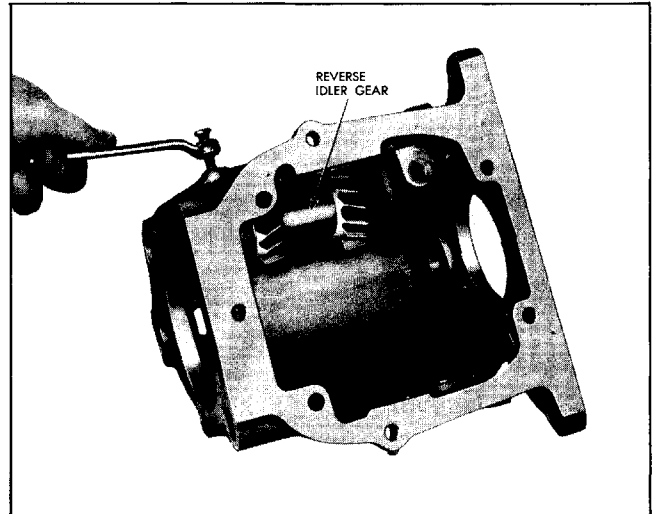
Removing or Replacing Reverse Idler Shaft Lock Screw
